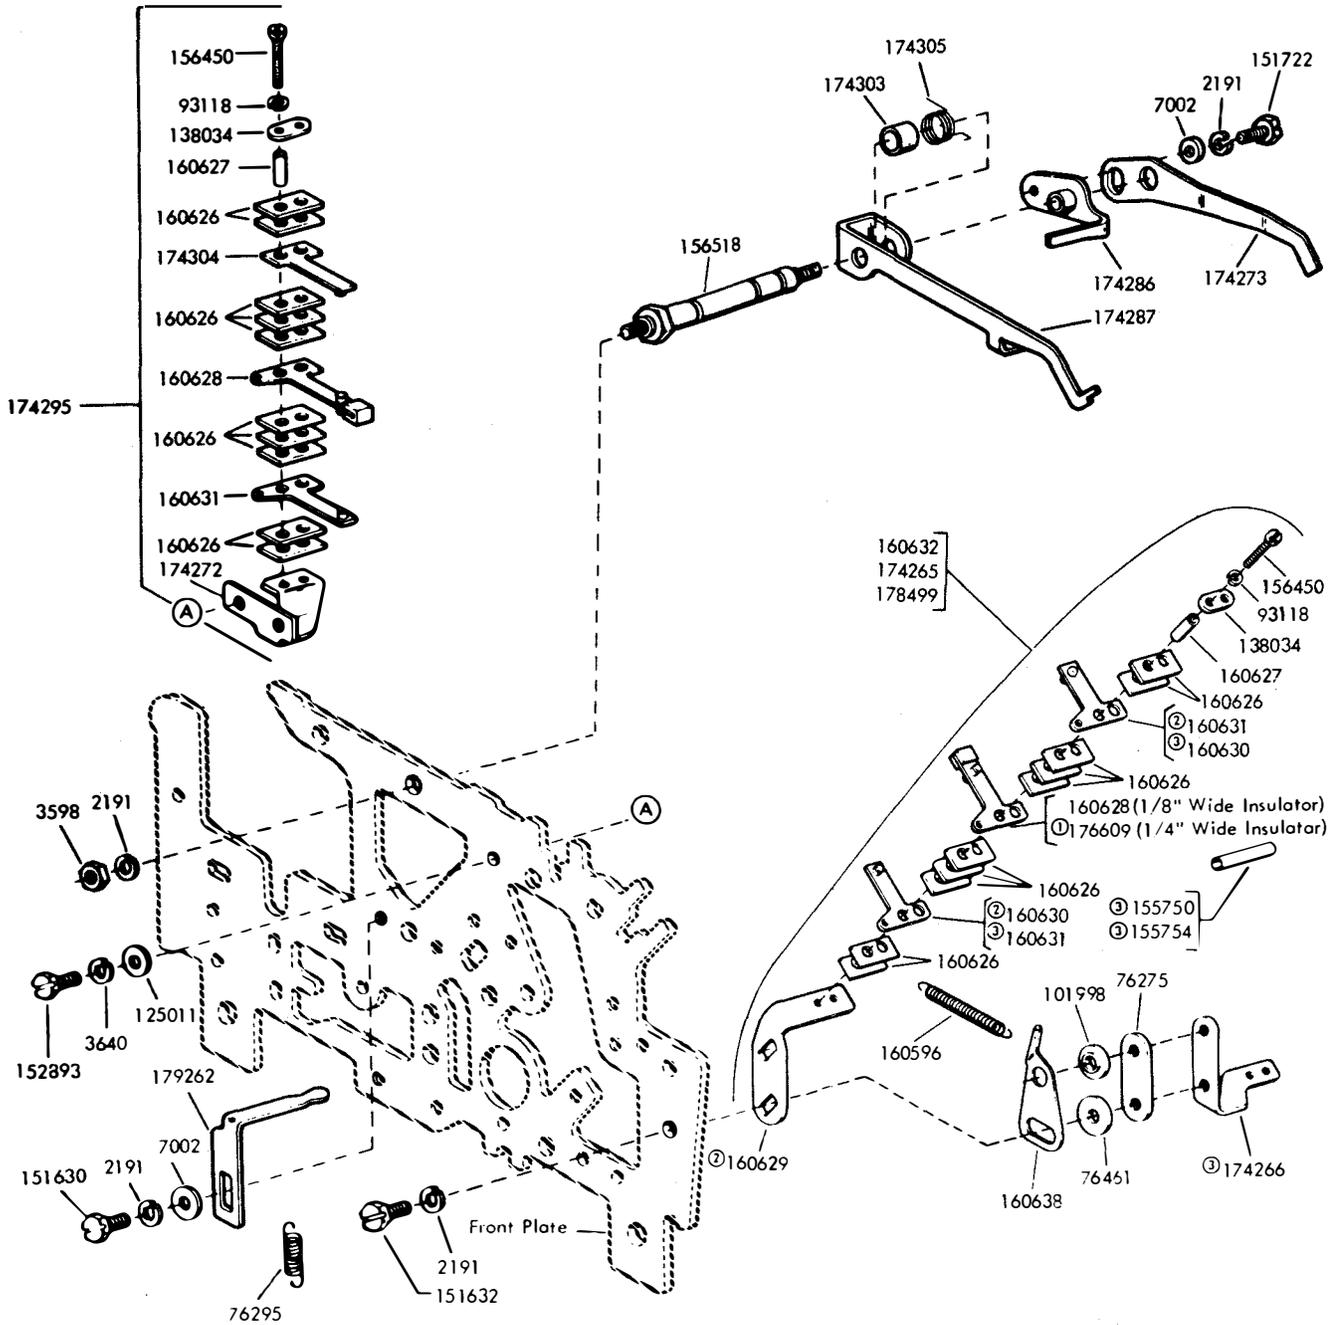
Front Plate Mechanism (Sheet 2 of 3)
